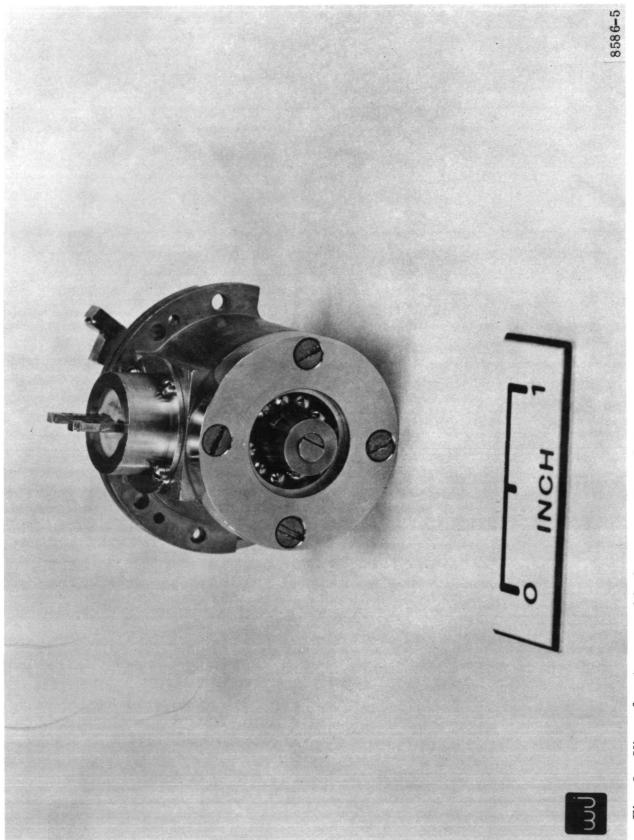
View of motor assembly from opposite end showing motor shaft bearing.
